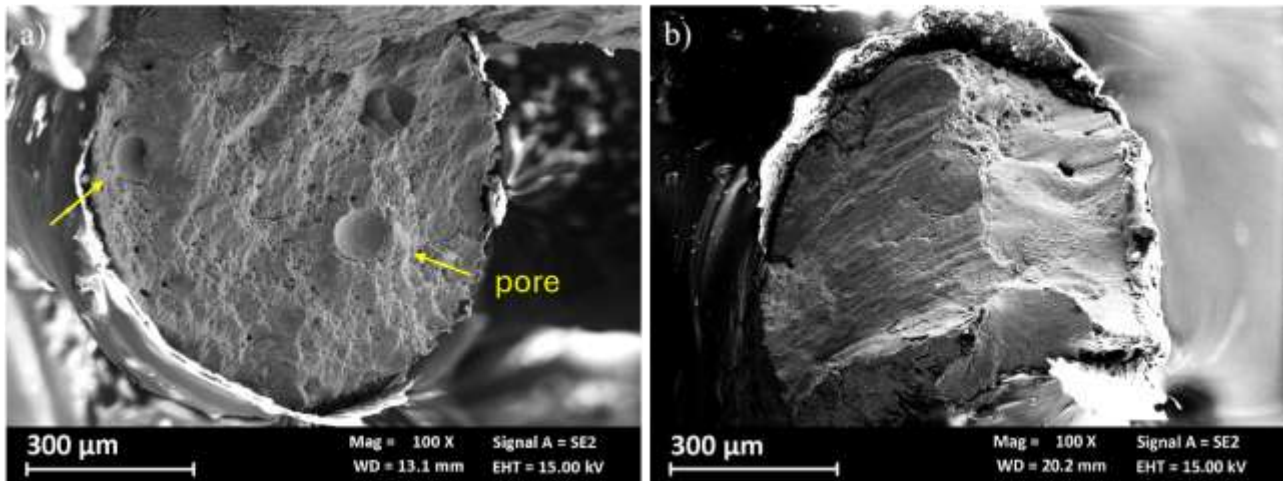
Low-magnification FESEM images of fractured struts with (a) internal pores and (b) damaged fracture surface.
